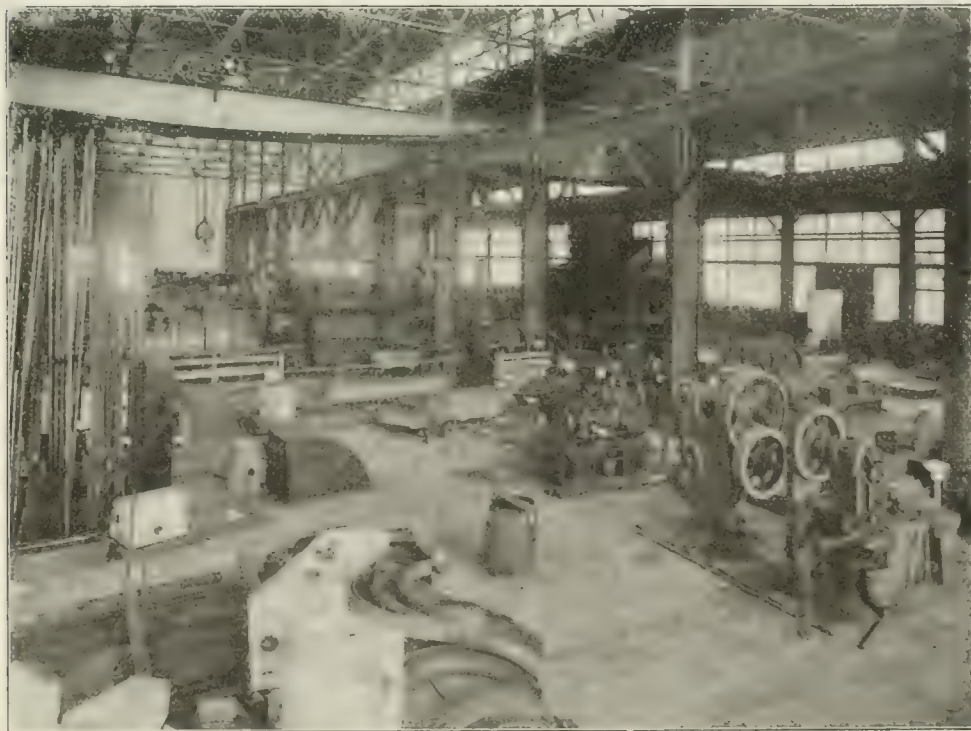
View in West Bay of Forge Shop, Where Stock is Received and Heavy Punching and Shearing Machinery is Located.
